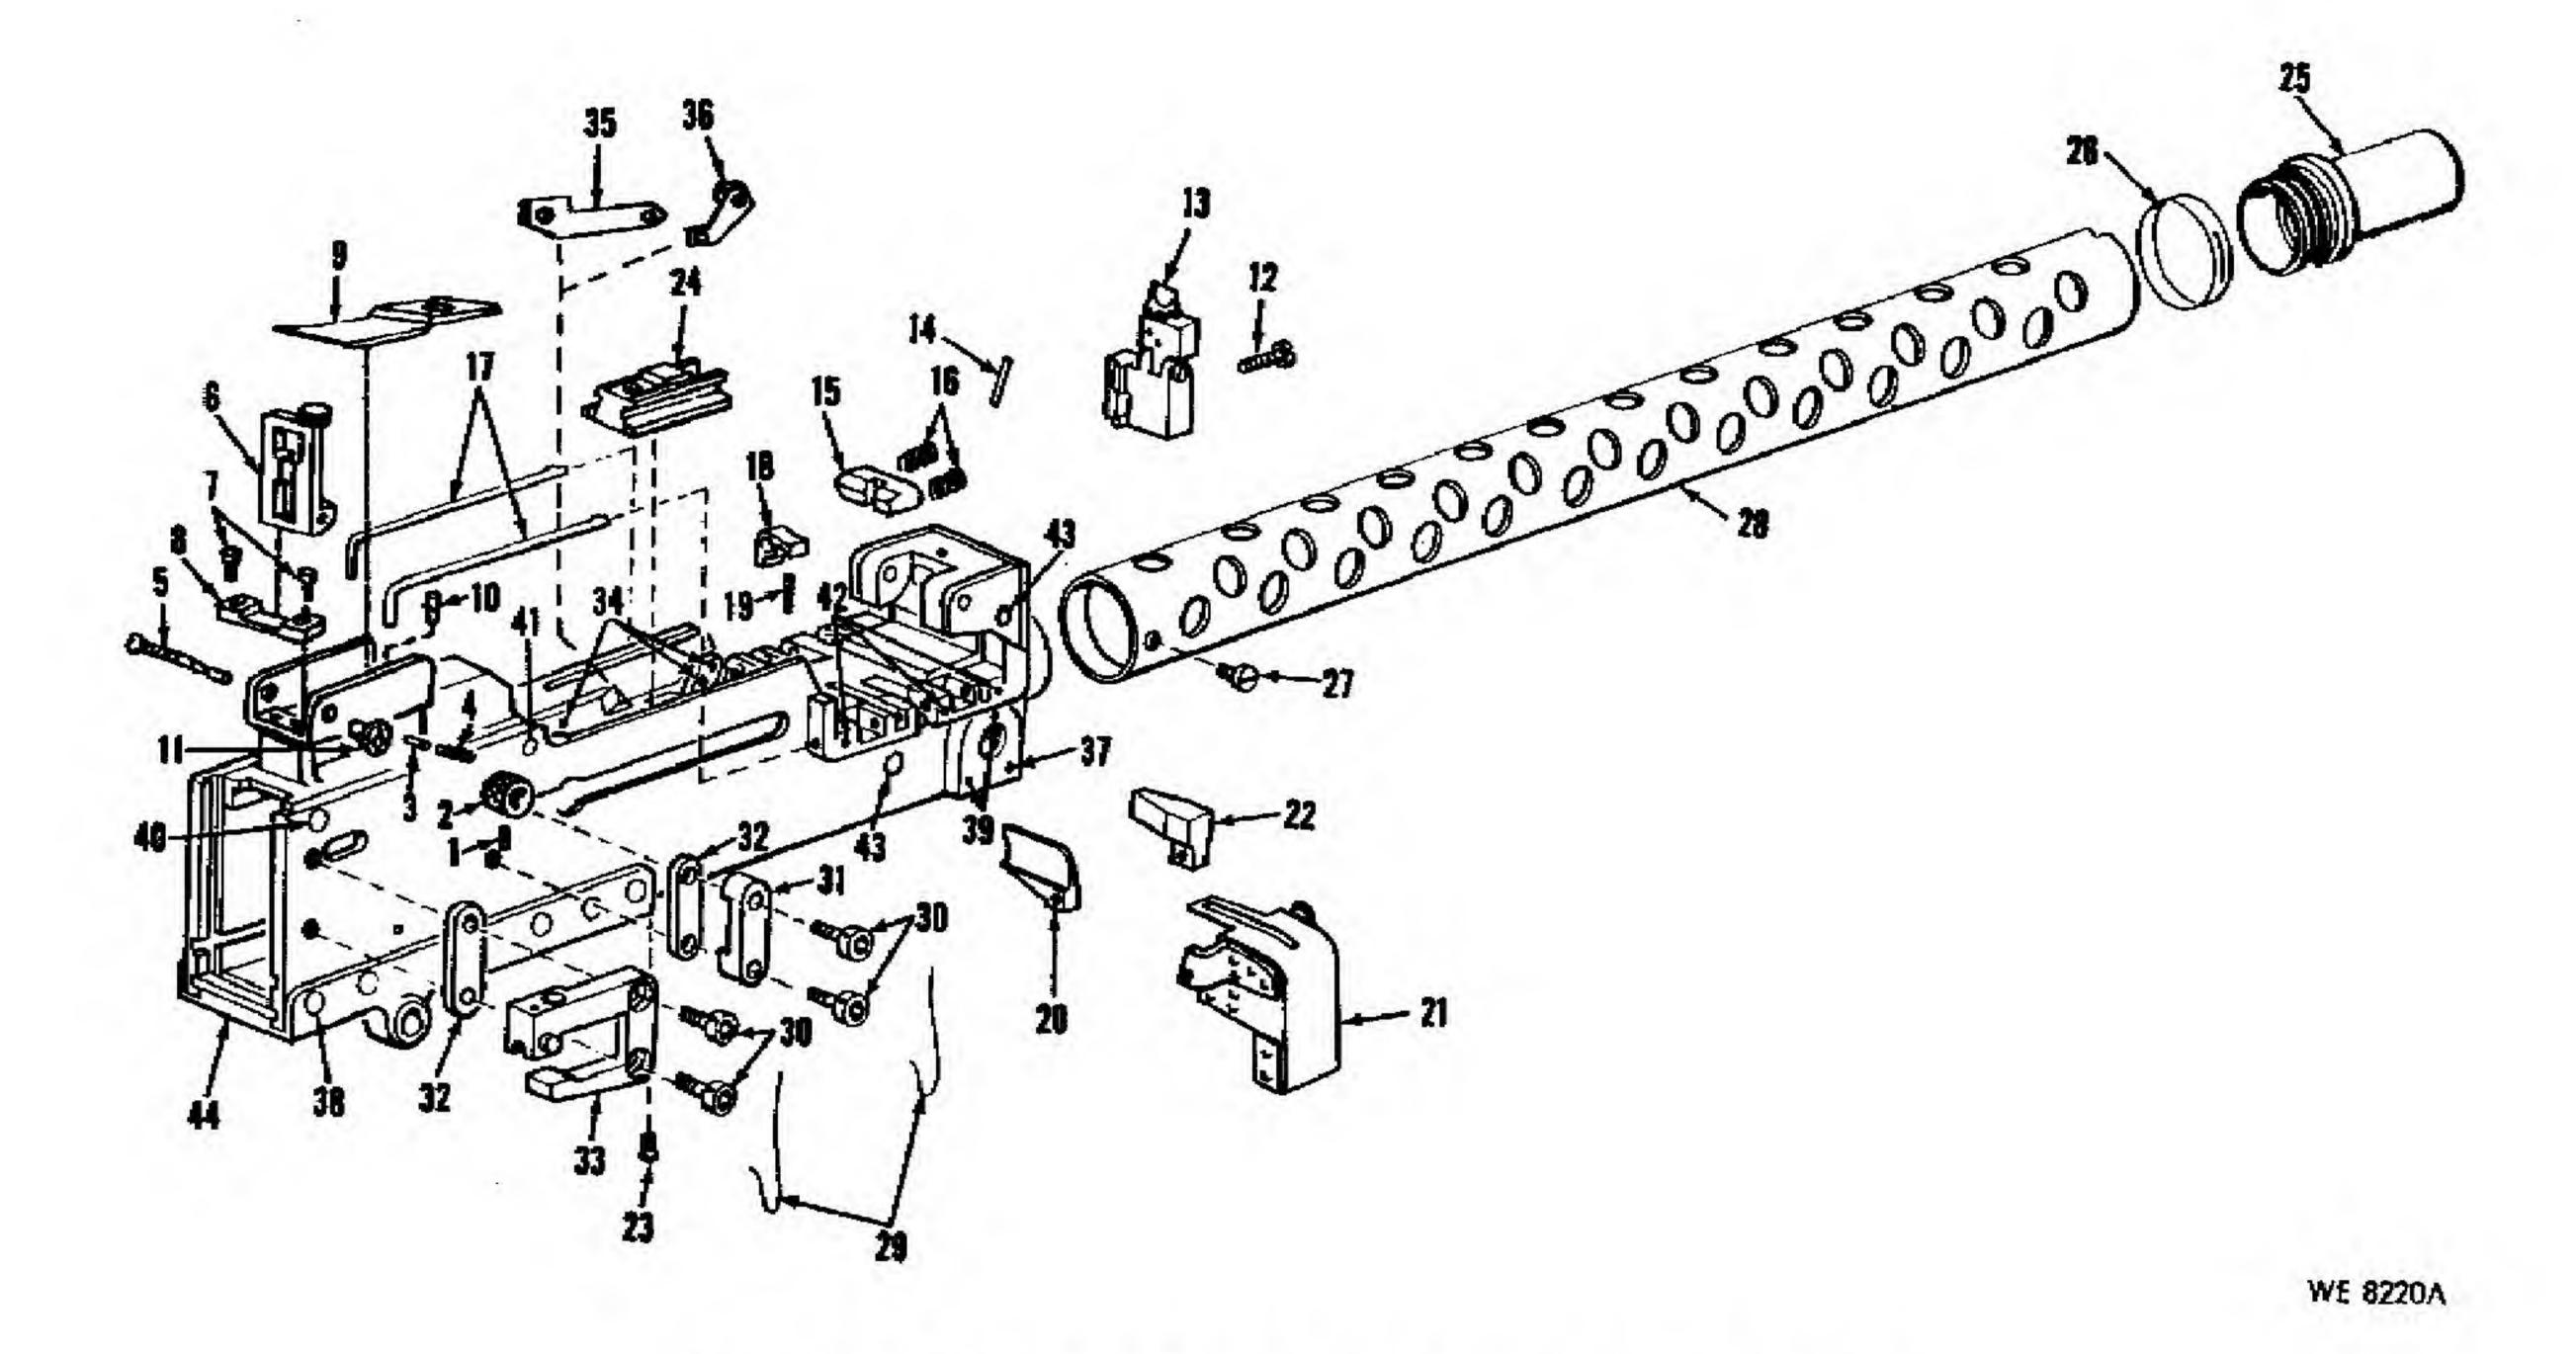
Casing and barrel jacket group for Caliber 30 Machine Gun, M37 only-exploded view.
